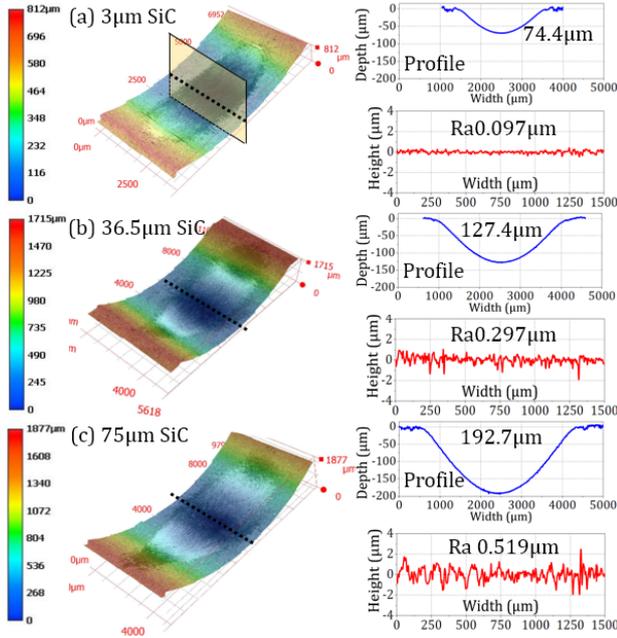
Surface roughness profile, three-dimensional and two-dimensional profile of polished footprint by magnetic polishing tool with (a) 3 μm SiC (b) 36.5 μm SiC and (c) 75 μm SiC abrasive coating
